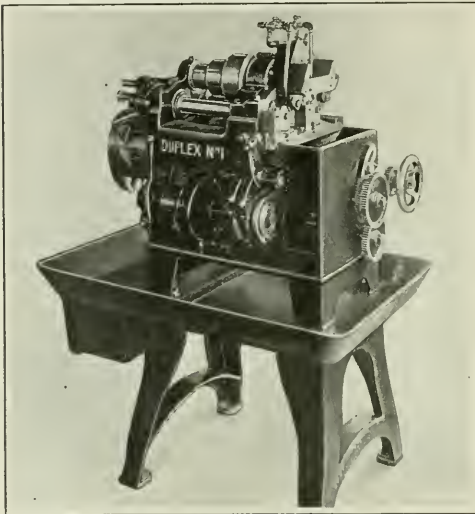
Double-spindle Automatic Forming Machine made by the L. P. Brown Machine & Tool Co.
